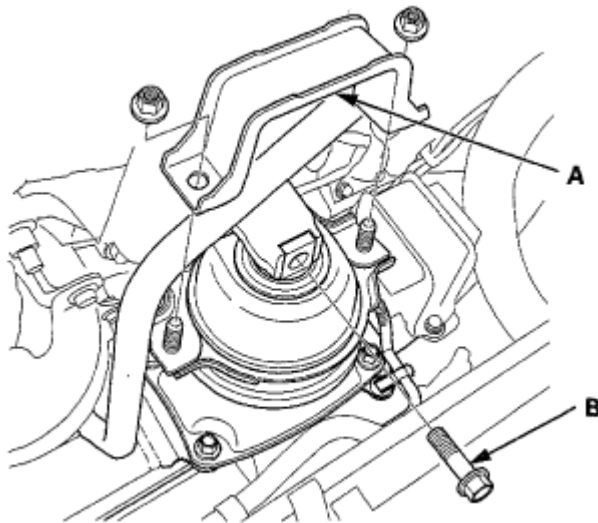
Identifying Front Engine Mount Stop And Front Engine Mount With Mounting Bolt
